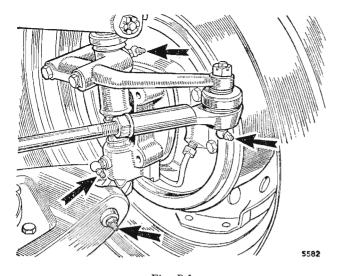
The four steering gear nipples on the left-hand wheel assembly
